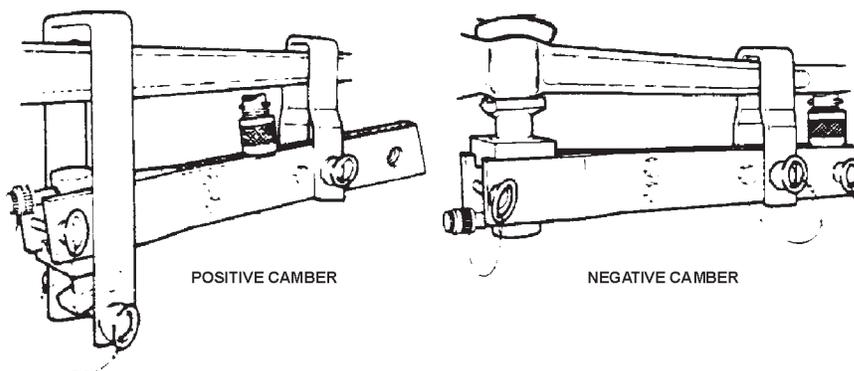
109, Camber Adjustment Using Hydraulic Bending Equipment
